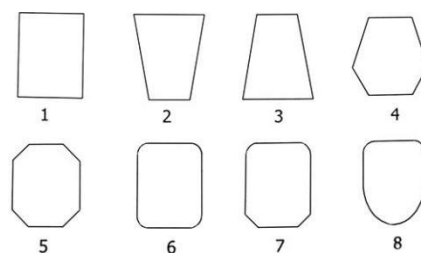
A variety of cross-sections of telescopic sections of boom cranes and loader cranes
